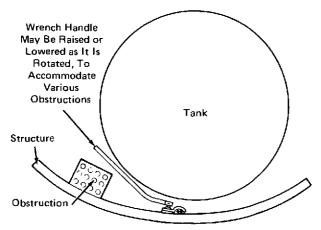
Swivel Handle Clears Obstruction While Maintaining Alignment With Recessed-Head Screw
